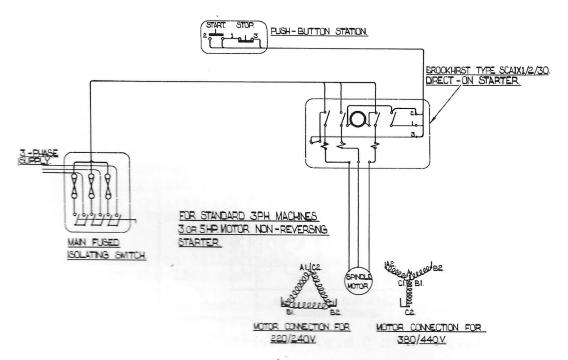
With 3 h.p. non-reversing motor 955 r.p.m. With 5 h.p. non-reversing motor 1440 r.p.m.
